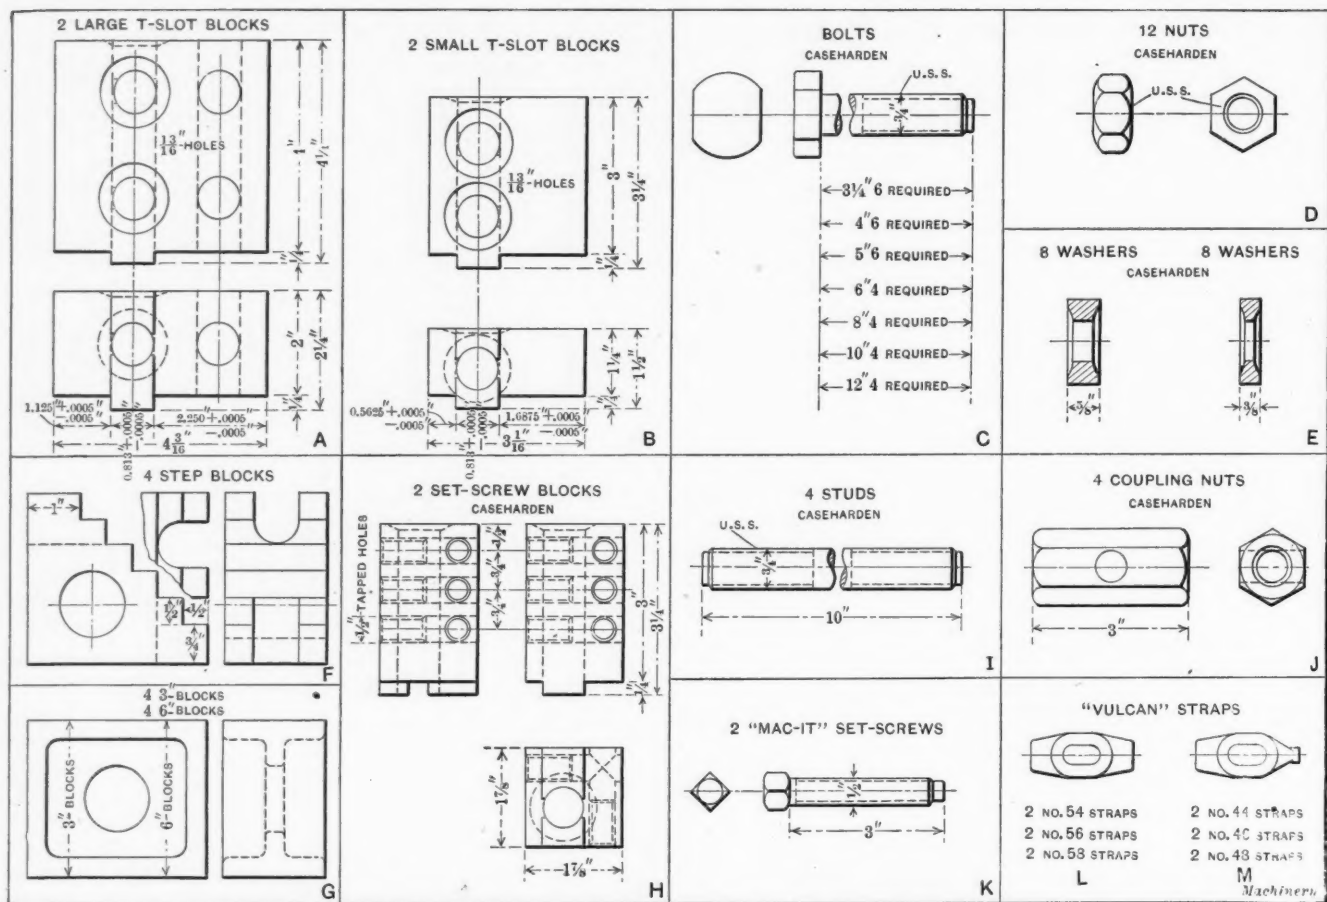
Specifications of a Set of Lucas Locating and Clamping Accessories for Machine Tools
